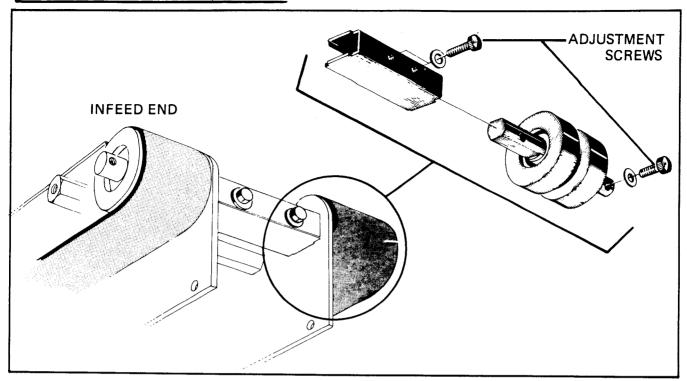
A - BOX DRIVE BELTS - LOWER TAPING HEAD
